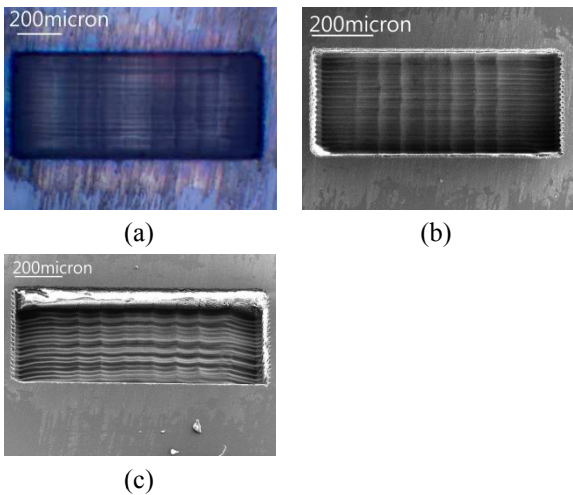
LIBWE milling with ultrasonic vibration (Depth 250µm); (a) tool microscope, (b) SEM picture, (c) tilted image
